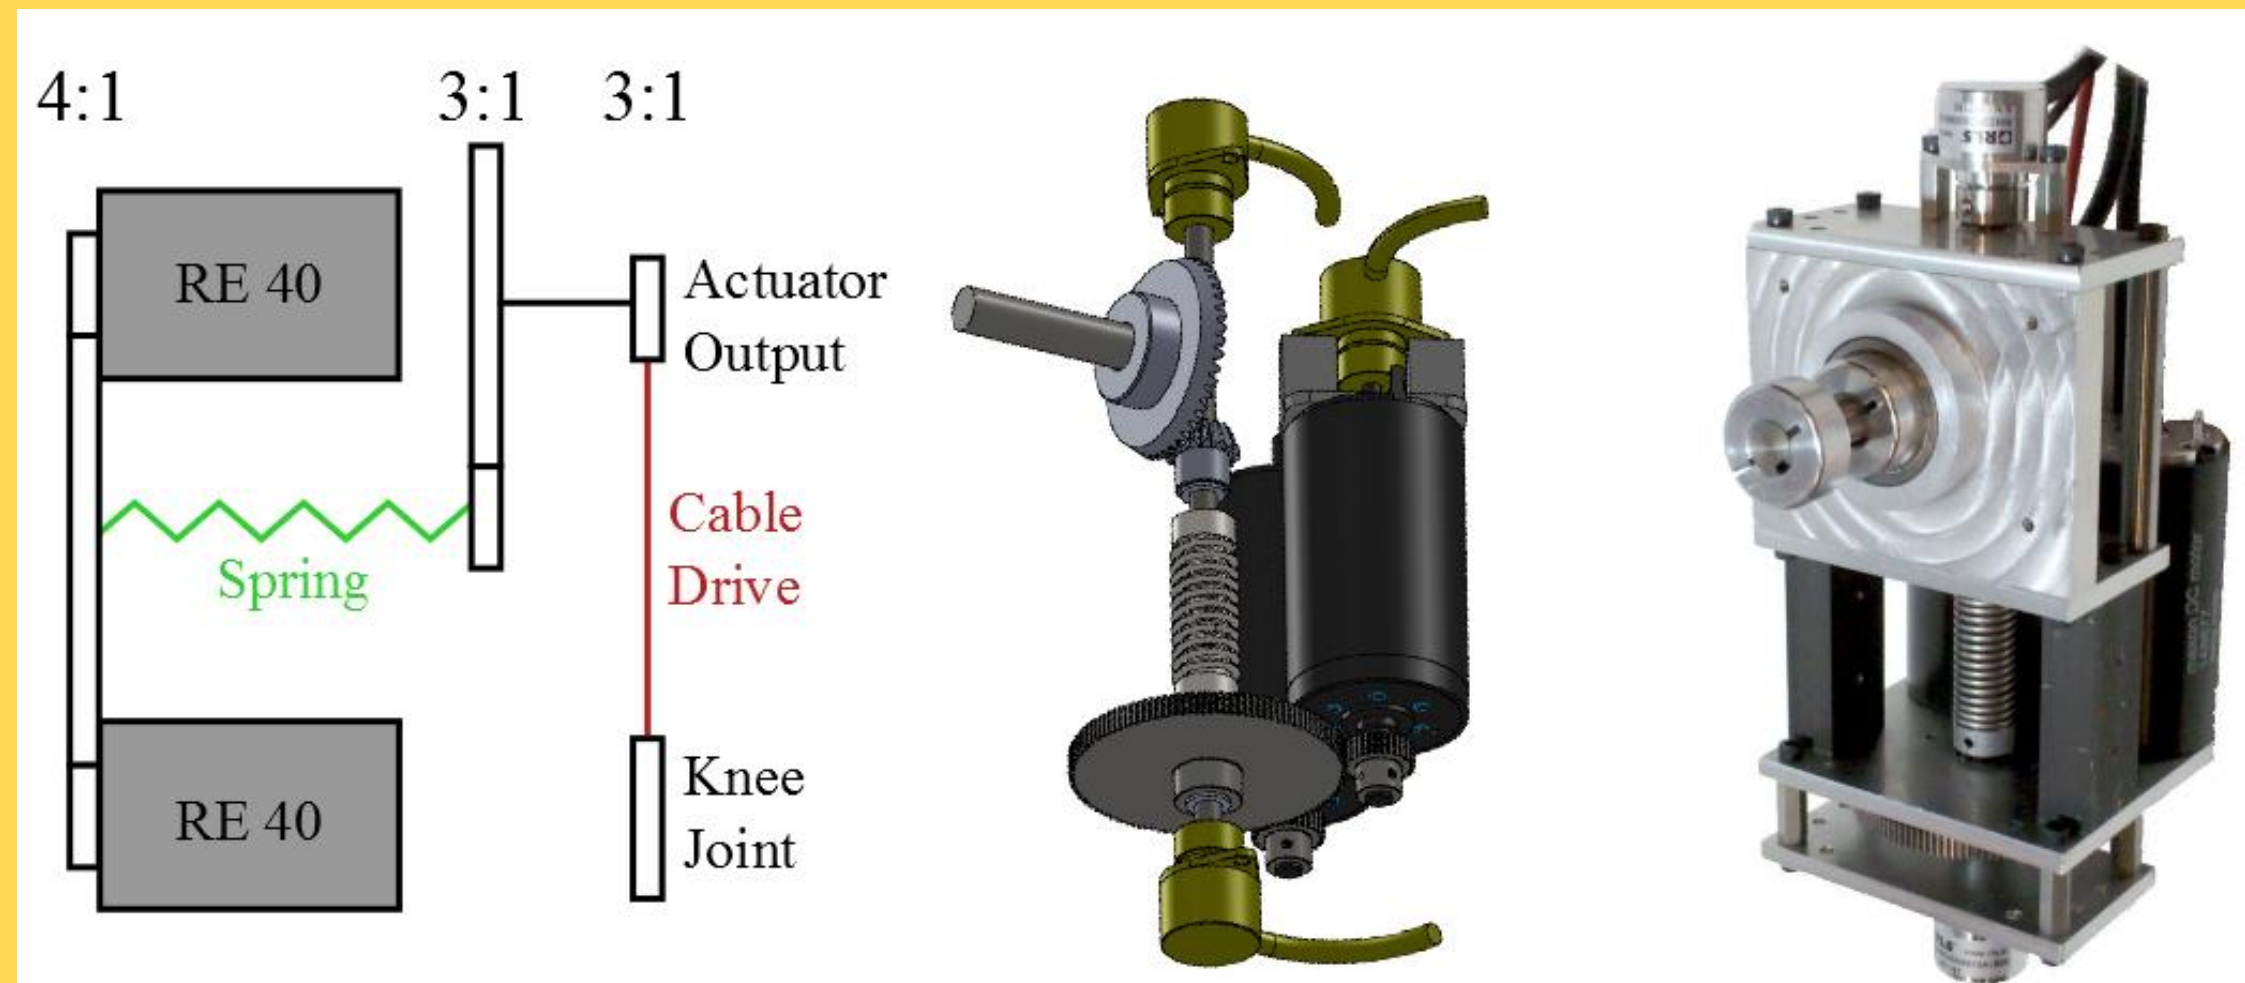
RNL SEAs. (L) Drivetrain schematic. (C) Drivetrain assembly. (R) Prototype.
